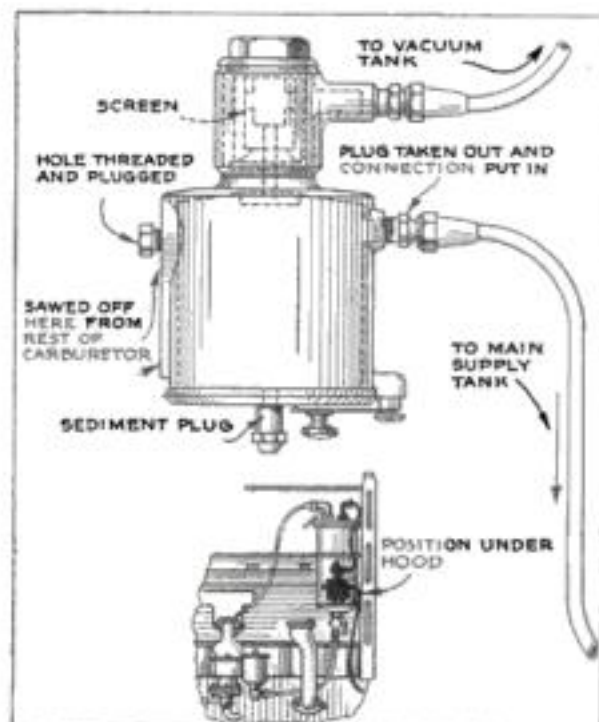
Old carburetor, with float and mixing chambers separate, makes good gas strainer.
